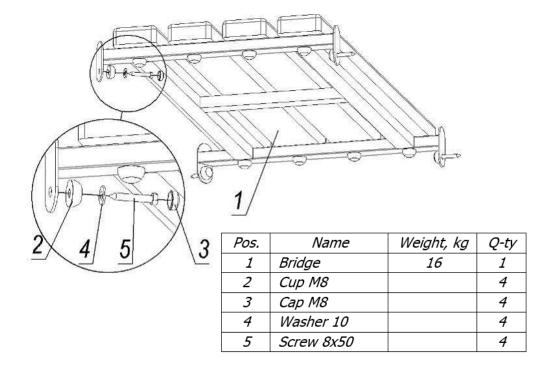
Completeness and assembly diagram of the platform with a steering wheel
